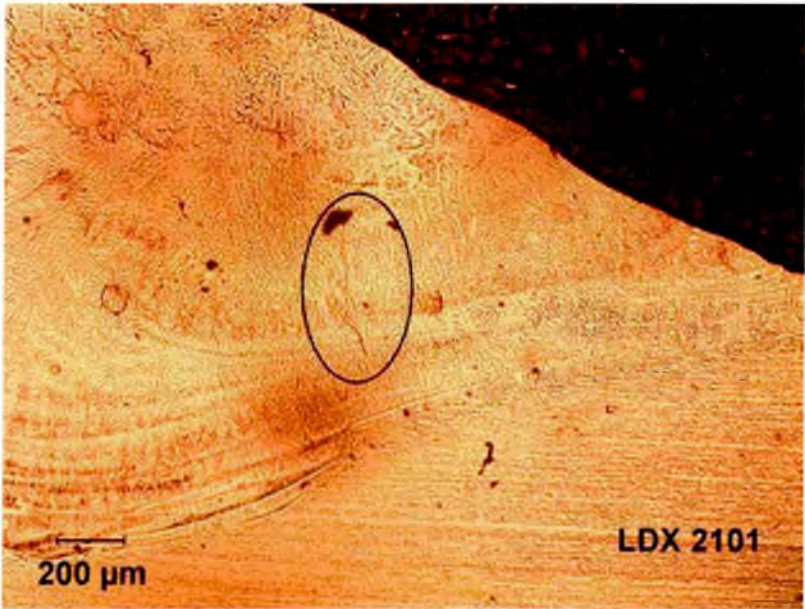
Solidification cracking observed in a lap joint of LDX 2101 laser hybrid welded to zinc coated mild steel
